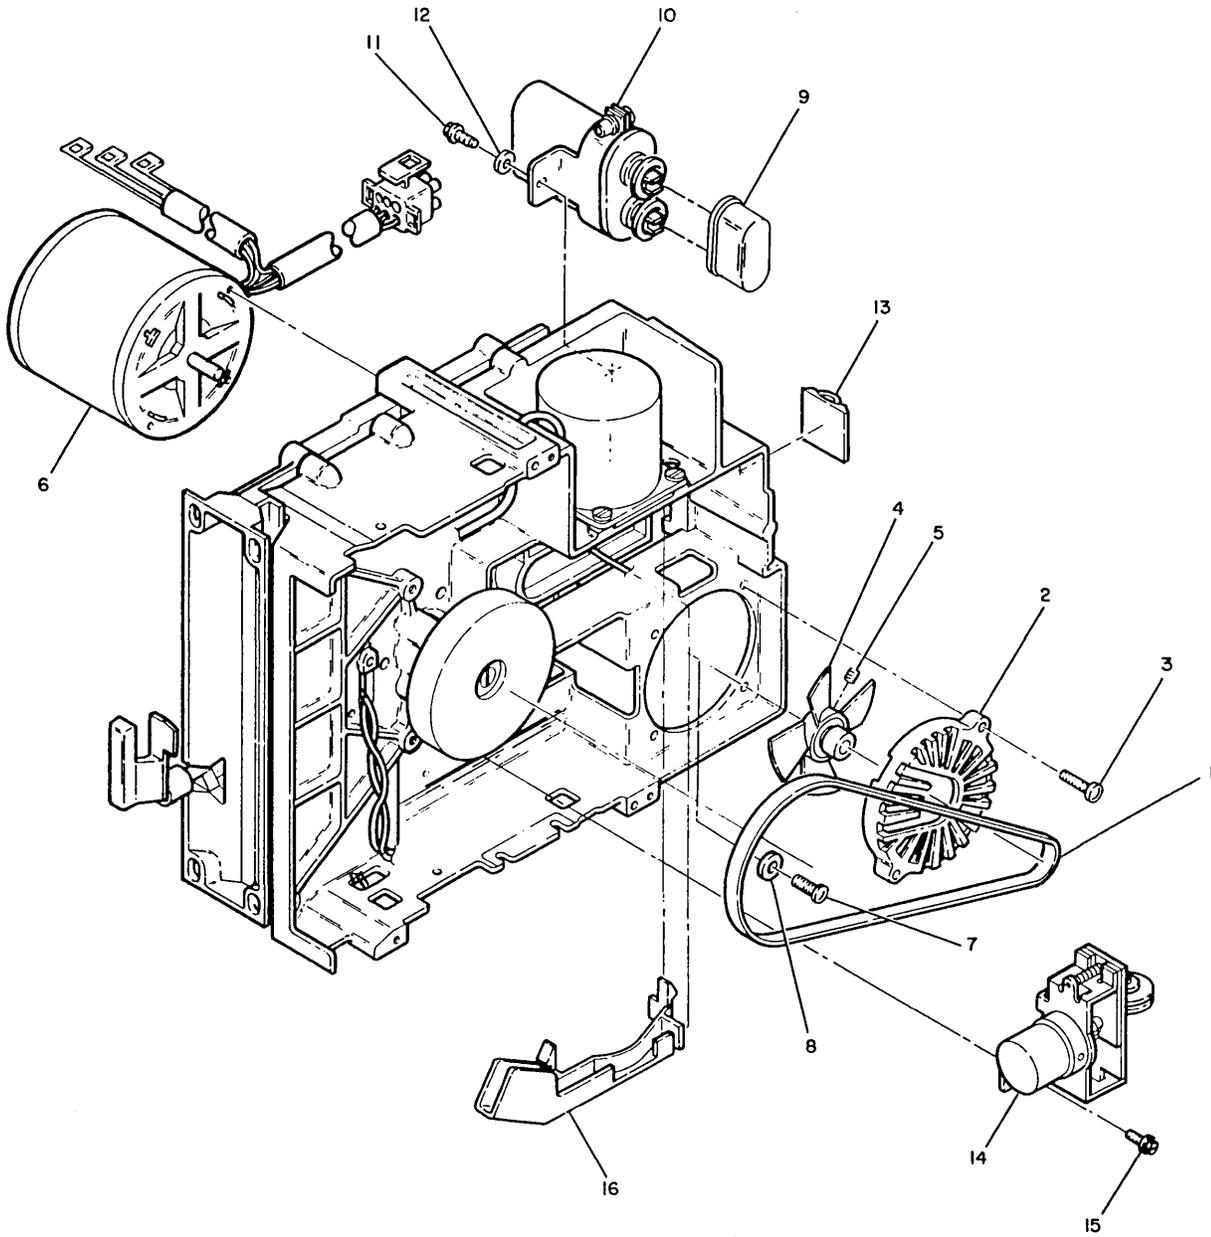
MOTOR, CAPACITOR, ACTUATOR ASSEMBLY
